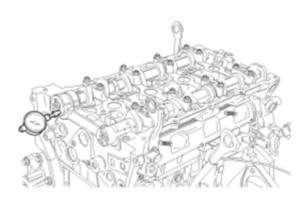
Inspecting Camshaft End Play Courtesy of KIA MOTORS AMERICA, INC.
